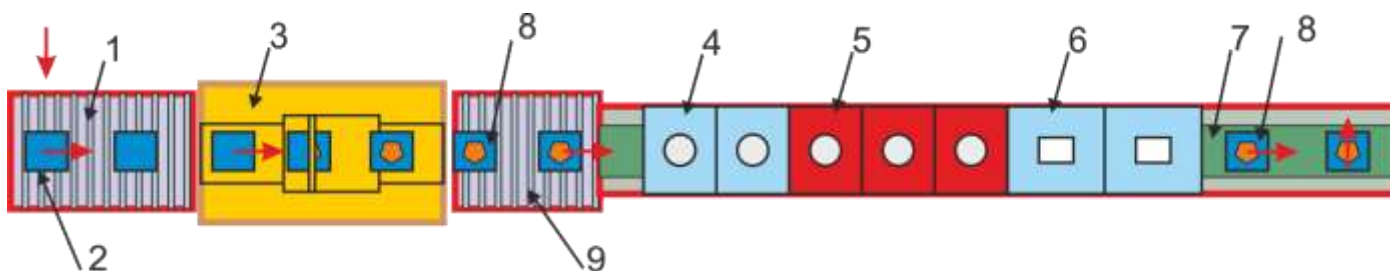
Example of flat glass printing line: 1 - loading on a roller conveyor, 2 - glass, 3 - silk screen printing machine, 4 - drying, 5 - firing, 6 - cooling zone, 7 - conveyor, 8 - printed glass, 9 - conveyor for print control
